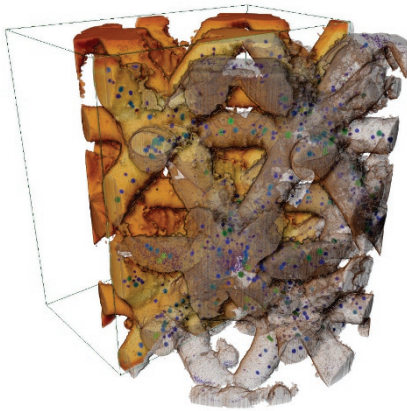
An Inconel 3D-printed lattice structure with the porosity shown by the blue dots. Sample courtesy of Kavan Hazeli, Mechanical and Aerospace Engineering, The University of Alabama, Huntsville, USA
